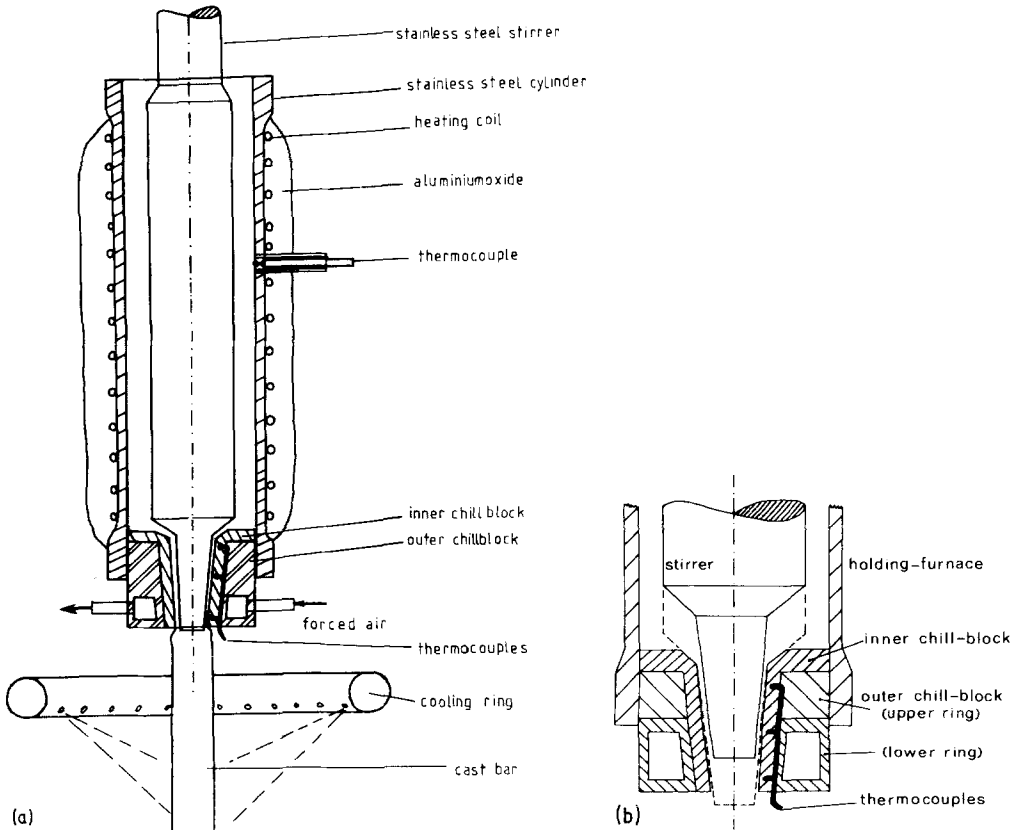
Mouldless stircasting of bars: (a) casting unit and (b) chill-block.
